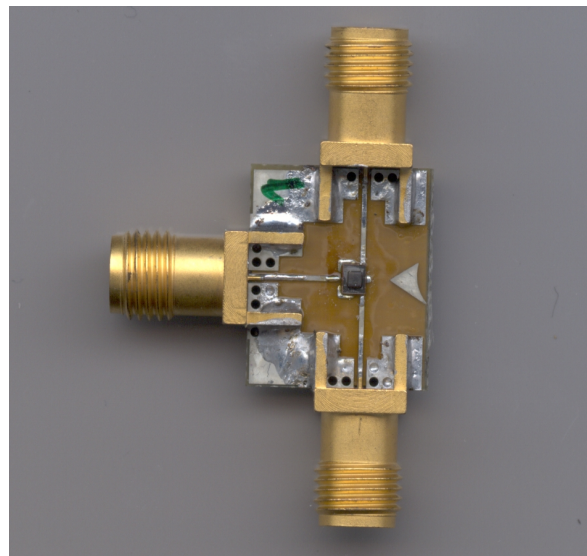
Top view of test PCB providing a neutral environment to the SAW component.
